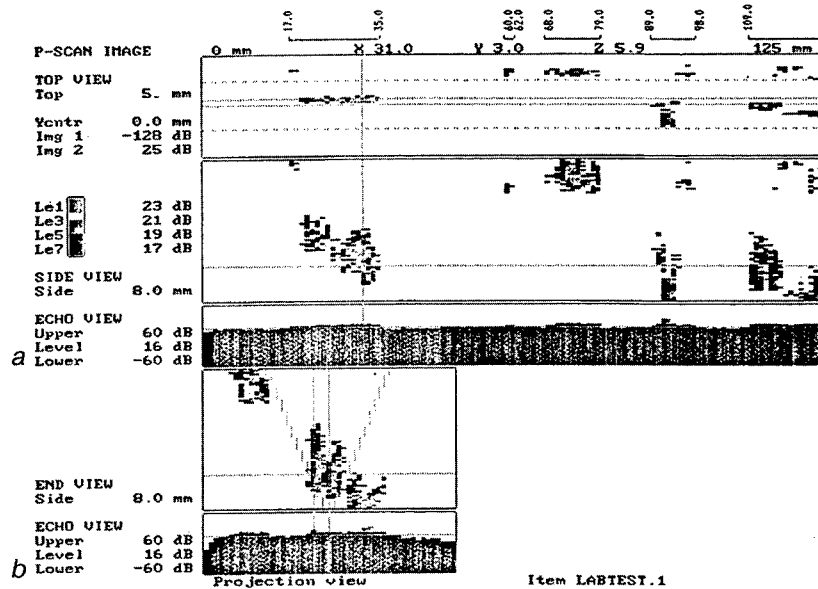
Location of reflectors in the welded joint zone: *a* — recording of echo-signals along the weld; *b* — recording of echo-signals across the weld
